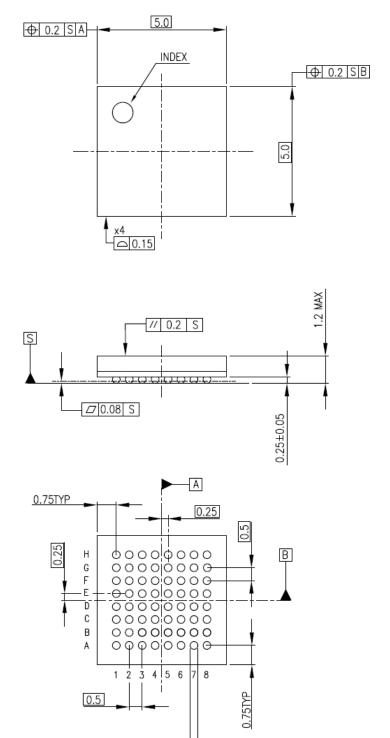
Package outline (P-TFBGA64-0505-0.50)
